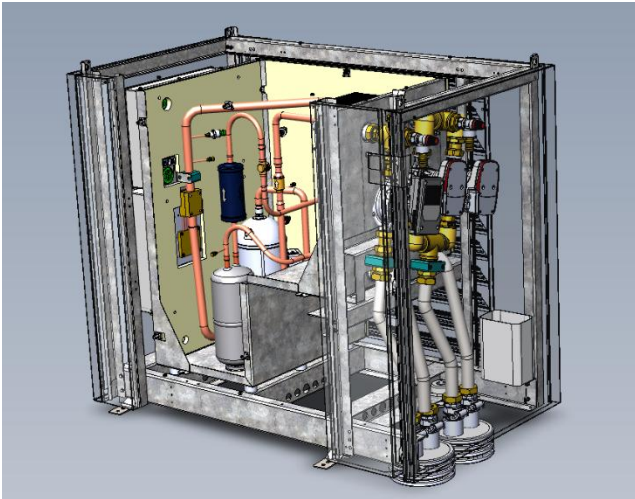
CAD-Drawing, rear-side - main assembly of R290 35kW BW-HP showing hydraulic interfaces and refrigerant cycle.
